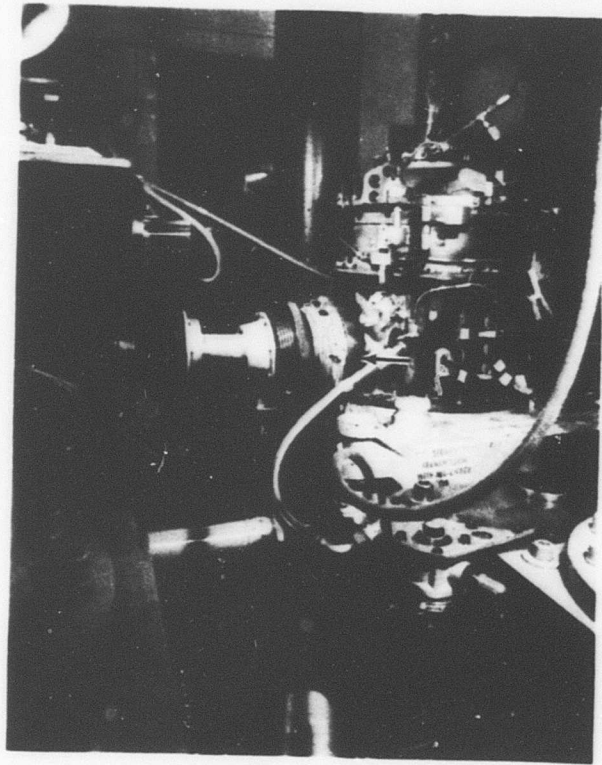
Right-Side View of Transmission After Failure of Composite Housing.
